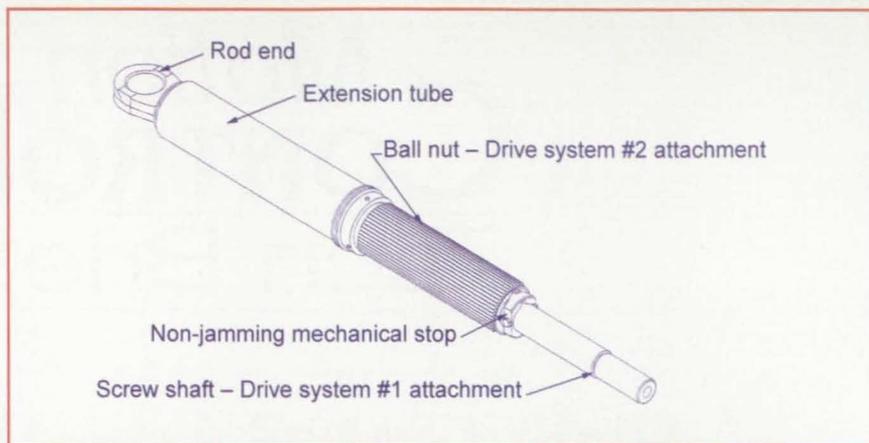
Isometric view of the X-33 FCAS ball screw assembly.
